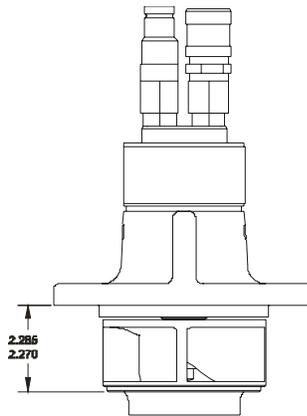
There should be an offset of between 2.270 and 2.285 inch from the bottom of the motor flange to the bottom of the stepped diameter.
